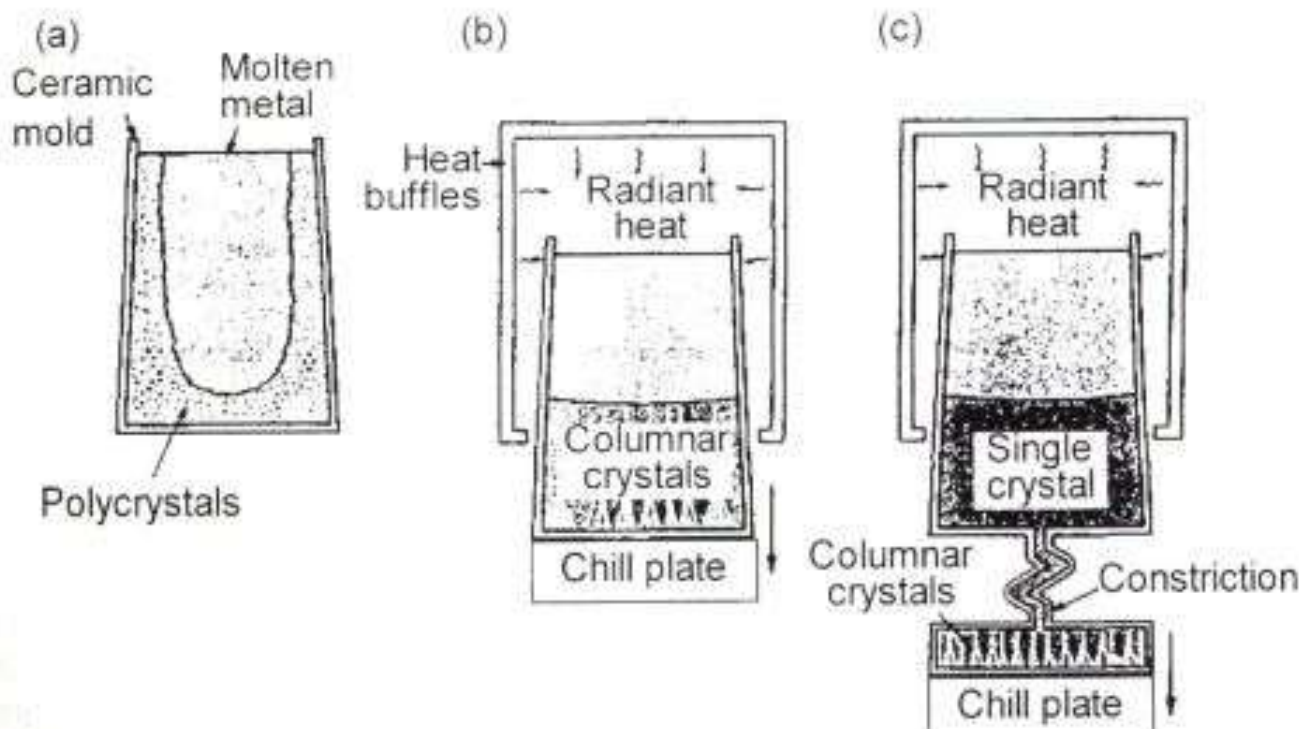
Three methods of casting turbine blades: (a) conventional casting with ceramic mold; (b) directional solidification; (c) method to produce single-crystal blade
